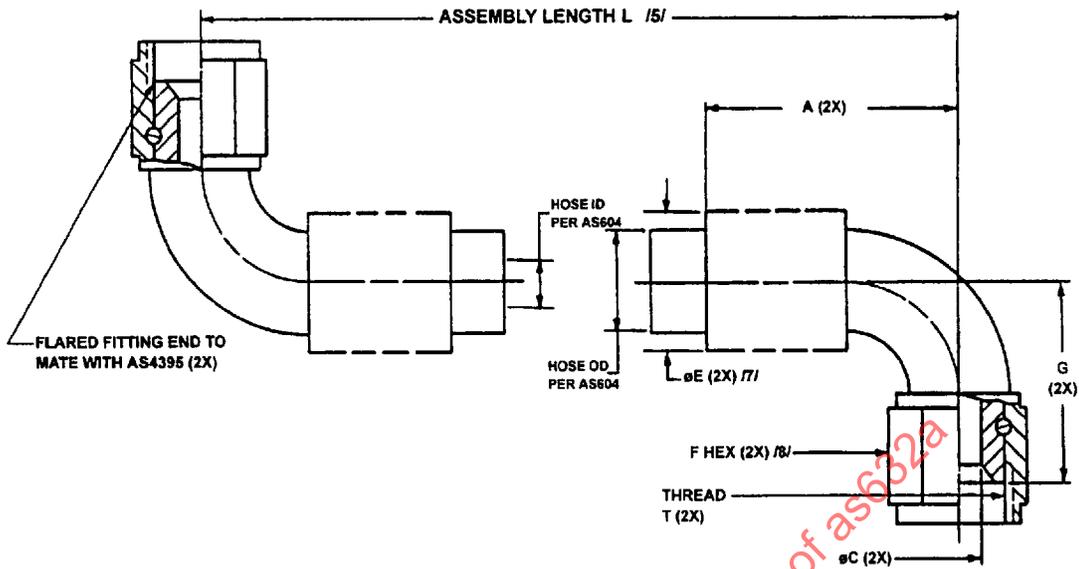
HOSE AND FITTING DIMENSIONS
